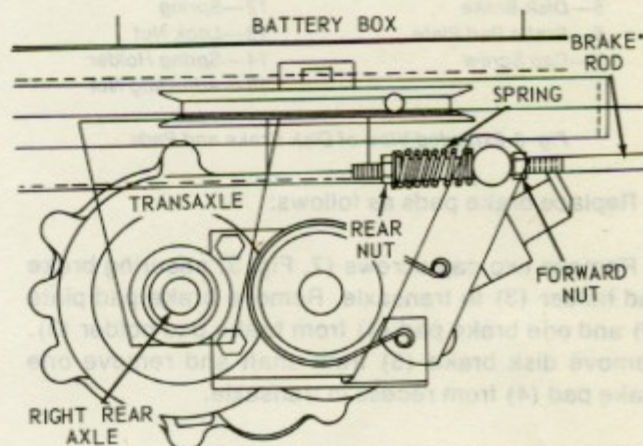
Brake Adjustment (Serial No. 1001-10,000)
